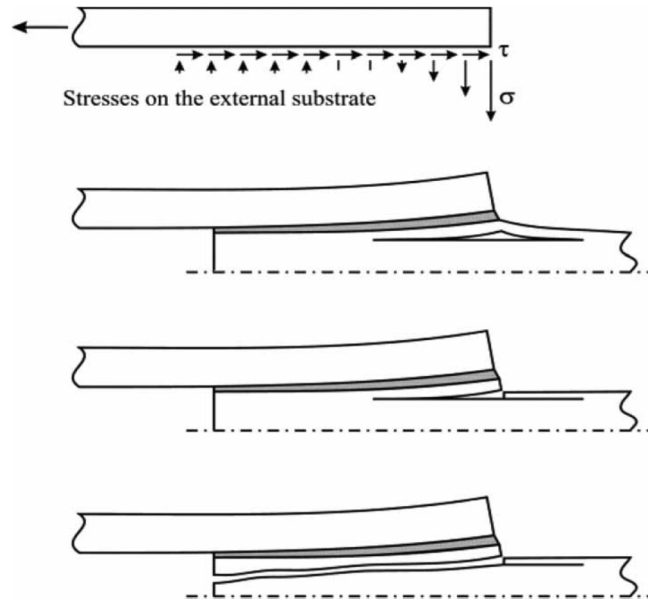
Failure in adhesively bonded double-lap joints due to the large transvers stresses of the adherend.
